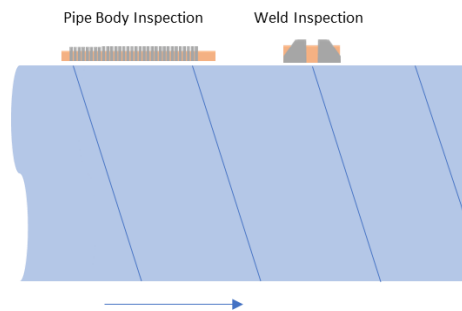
Arrangement for online inspection of Spiral Welded Tube.
